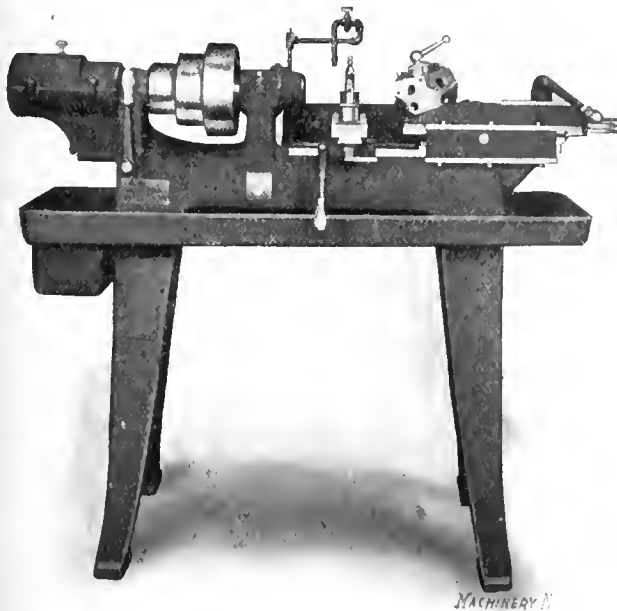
No. 1 Size Tilted Turret Screw Machine
